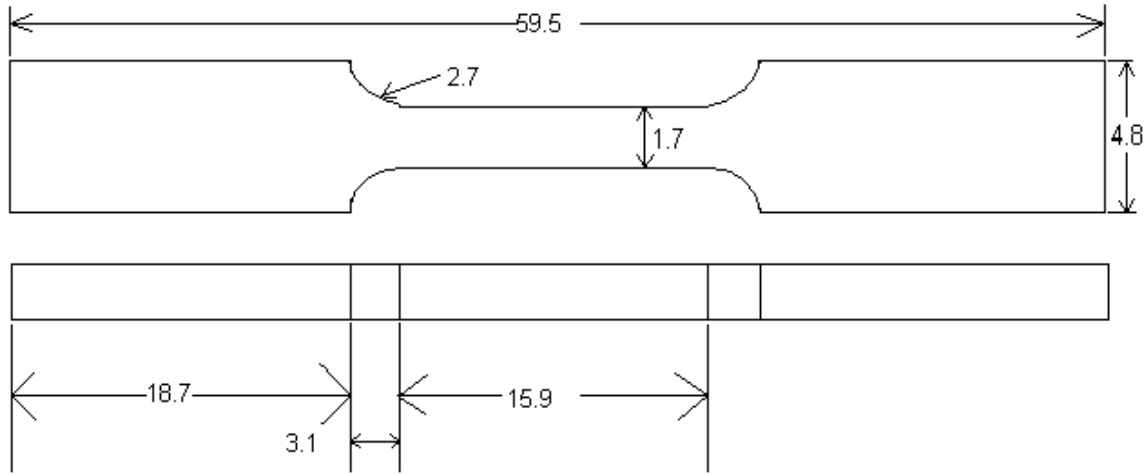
Schematic of Miniature Tensile Specimen. Dimensions in mm, From [10].
